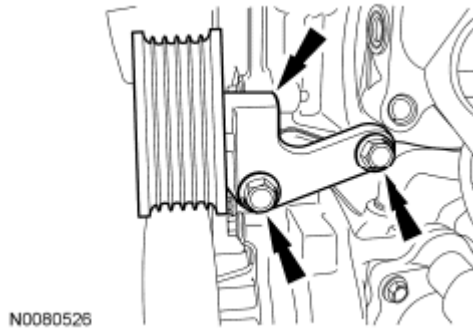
Locating Accessory Drive Belt Idler Pulley Bracket & Bolts
